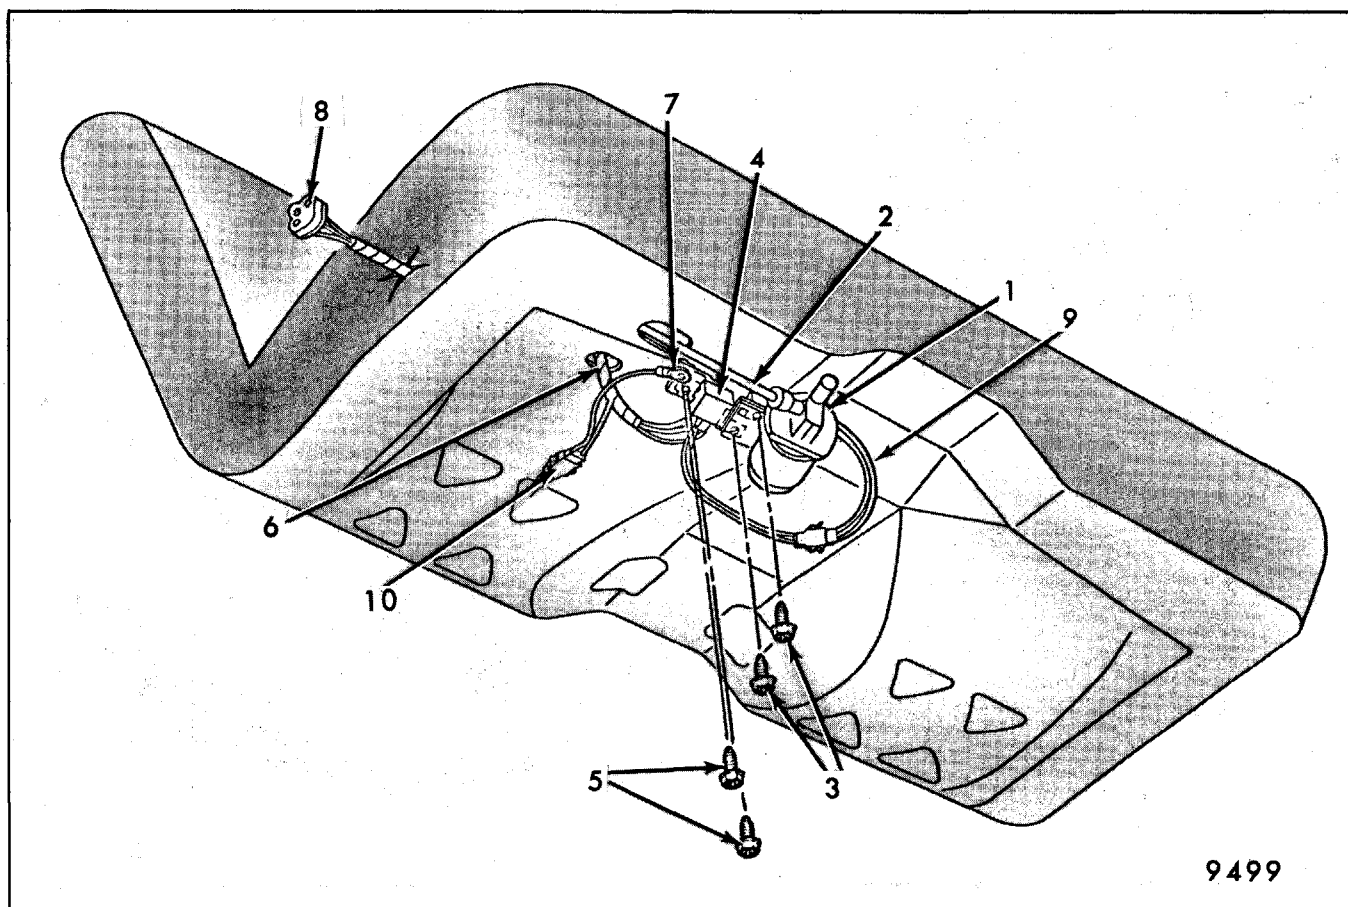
"B and C" Body Power Operated Reclining Seat Back Motor, Drive Cable, Relay and Wire Harness - Split Back Full Width Seat
